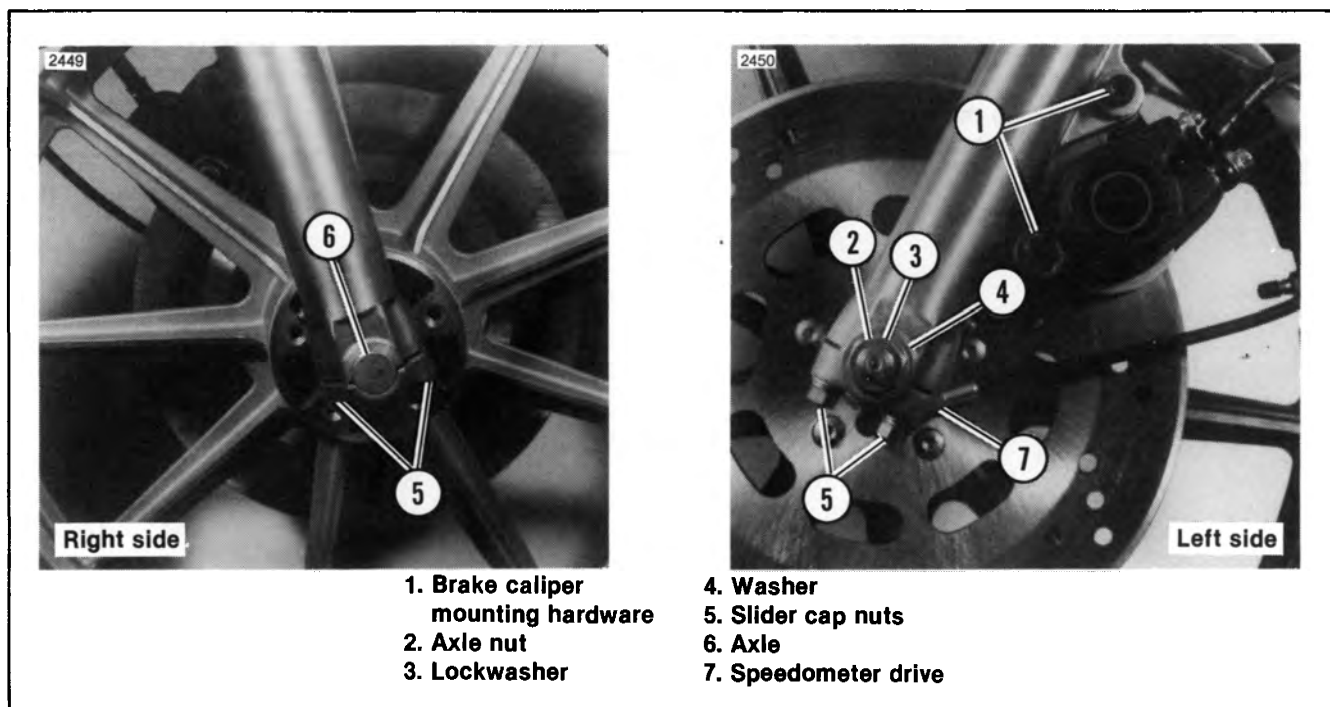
Front Wheel Mounting — 1984-1987 FXR Models Except 1987 FXRSE, FXLR
